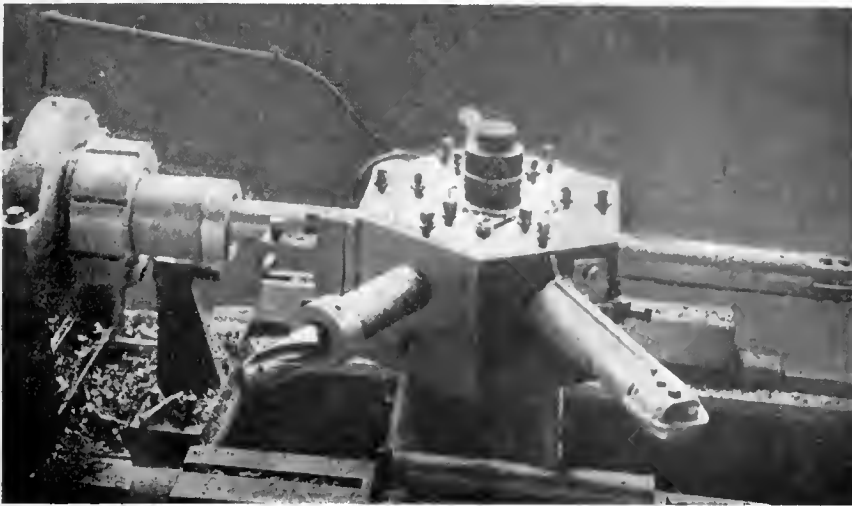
BORING ON A JOHN McDUGALL CO. LATHE.
